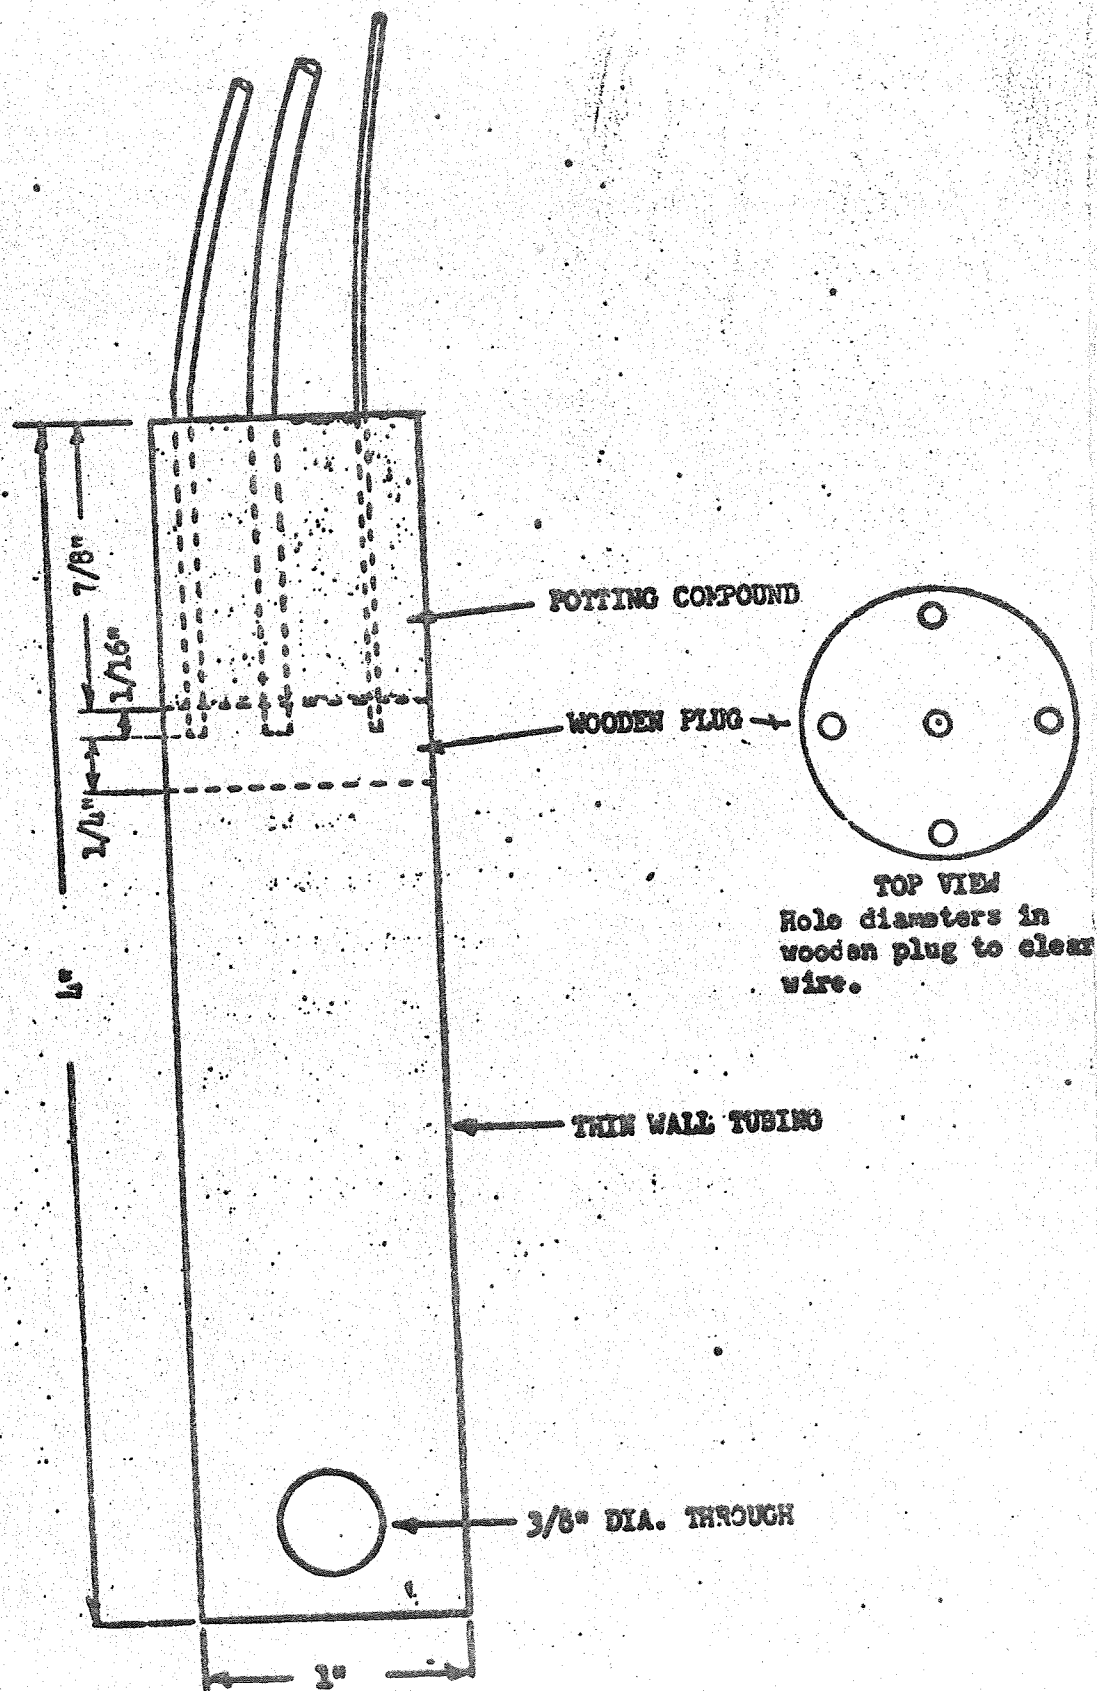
FIGURE I SAMPLE HOLDER CROSS-SECTION SHOWING METHOD OF POTTING WIRE SAMPLES FOR TENSILE TEST
